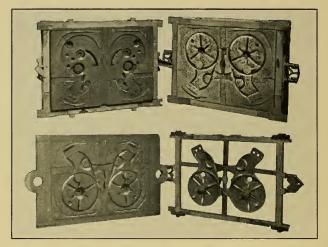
Upper left-drag mould; right-cope mould. Lower left-hard sand match; right-pattern mounted in vibrator frame.
